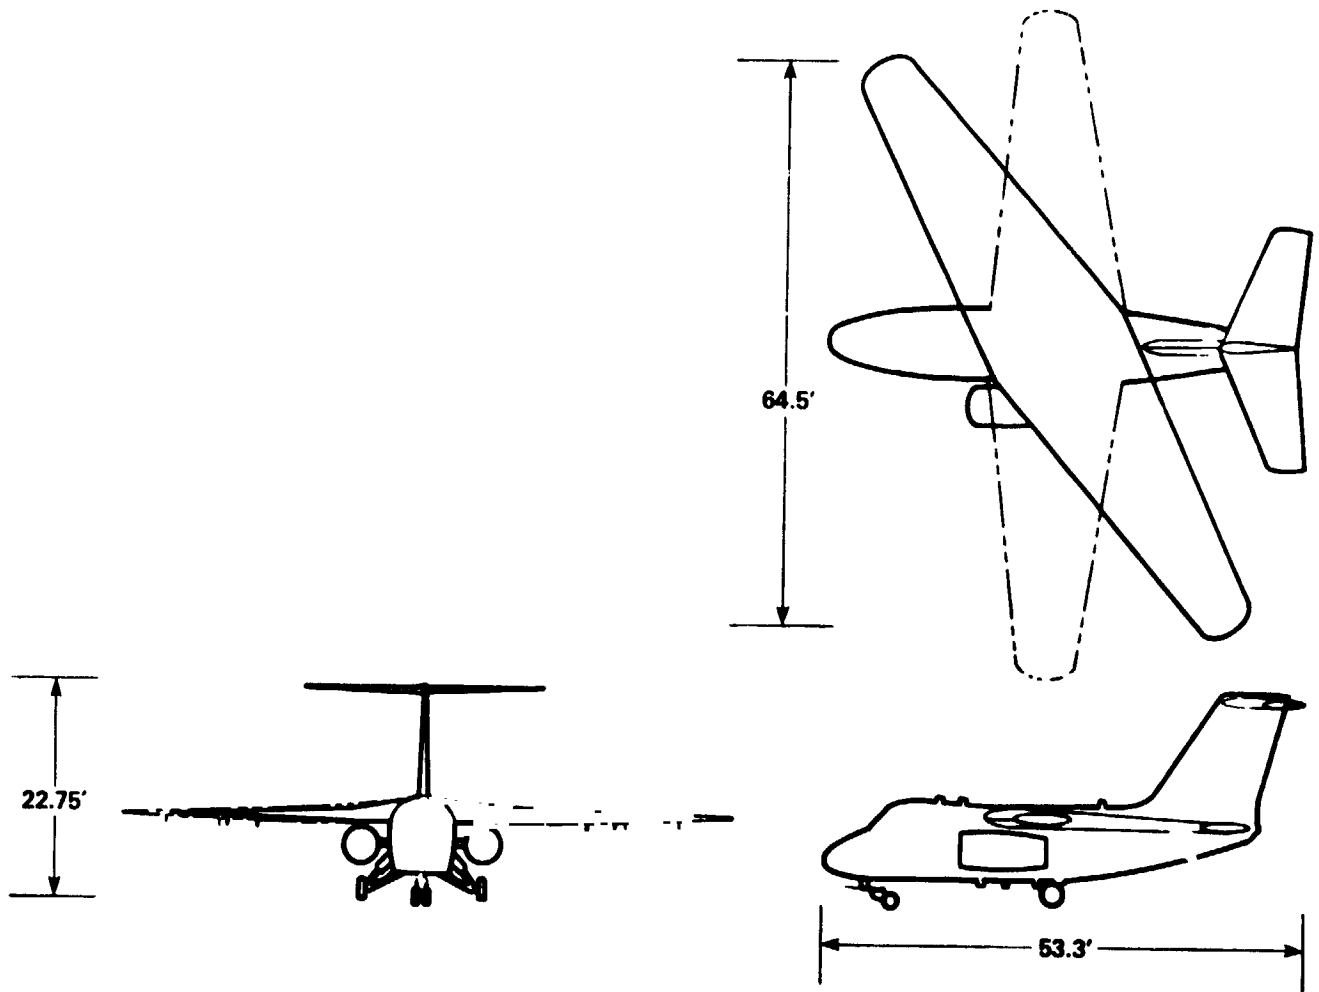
S-38 Oblique Wing Design Outline Drawing
